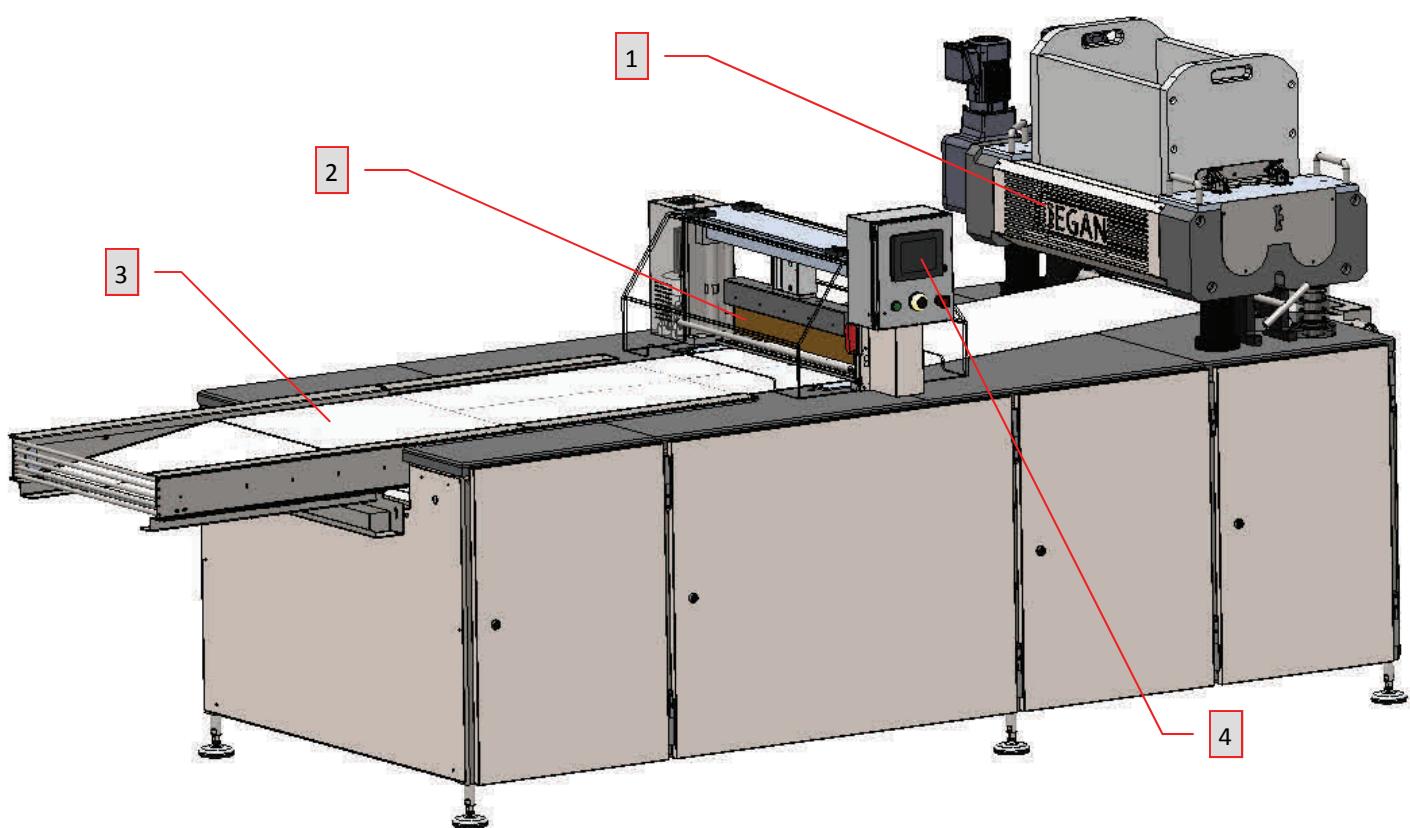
BAR CUTTER AND RETRACT CONVEYOR
